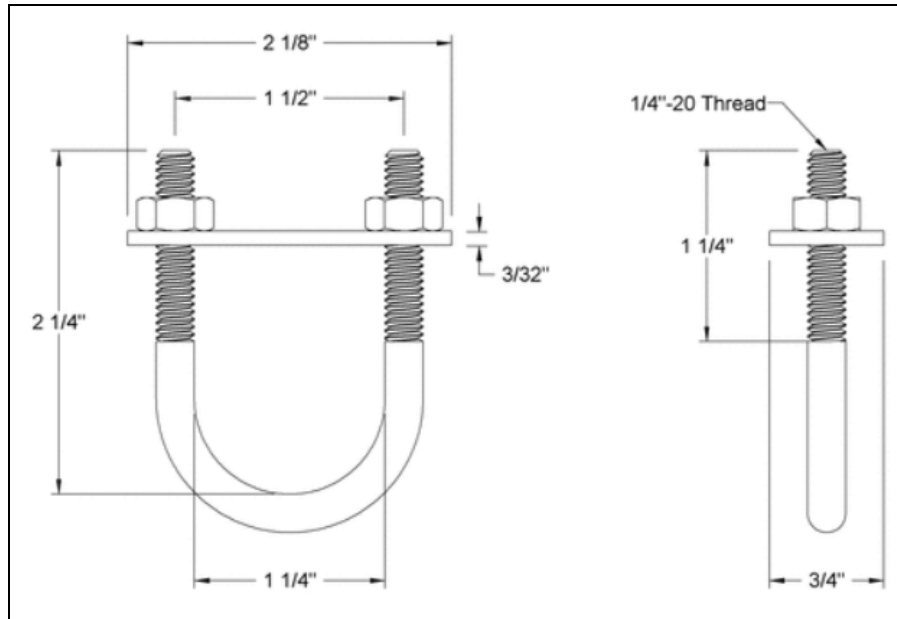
Detailed drawing of U-bolts from McMaster Carr
